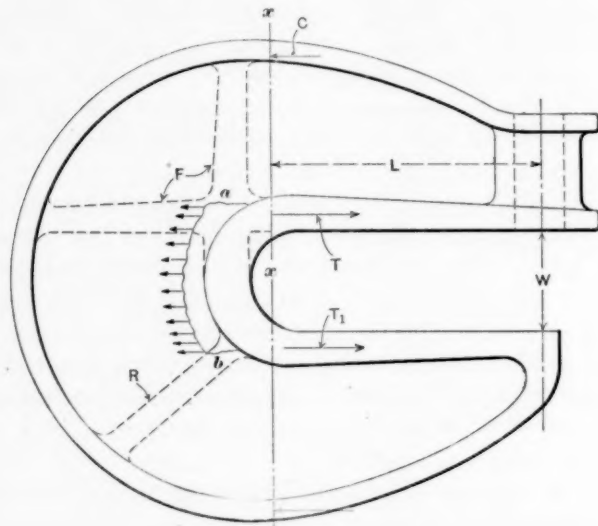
BULL RIVETER FRAME OF USUAL DESIGN
